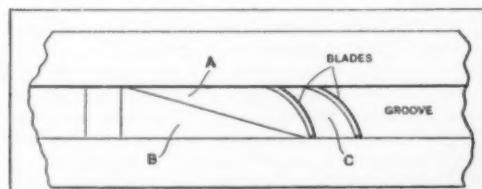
View of a groove in the turbine rotor, showing method of starting to replace the blades.
